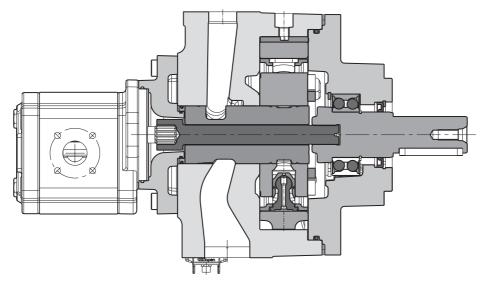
Radial piston pump with add-on gear pump using SAE-B adapter
